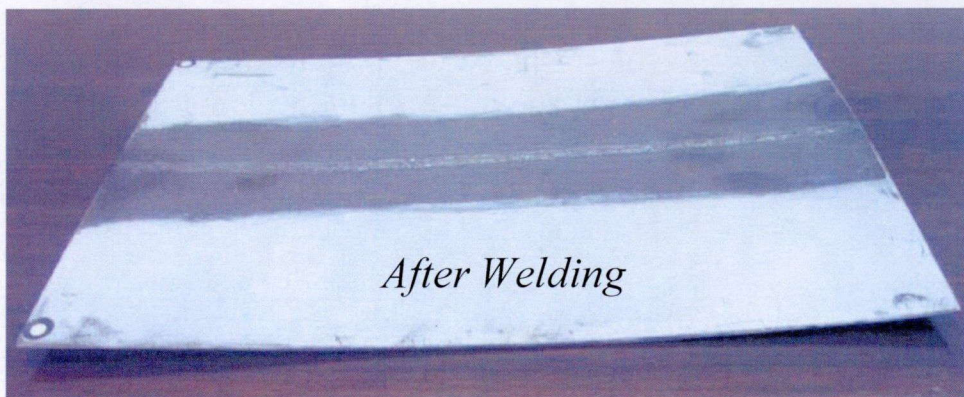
Welding distortion of test specimen due to bead on plate welding.
